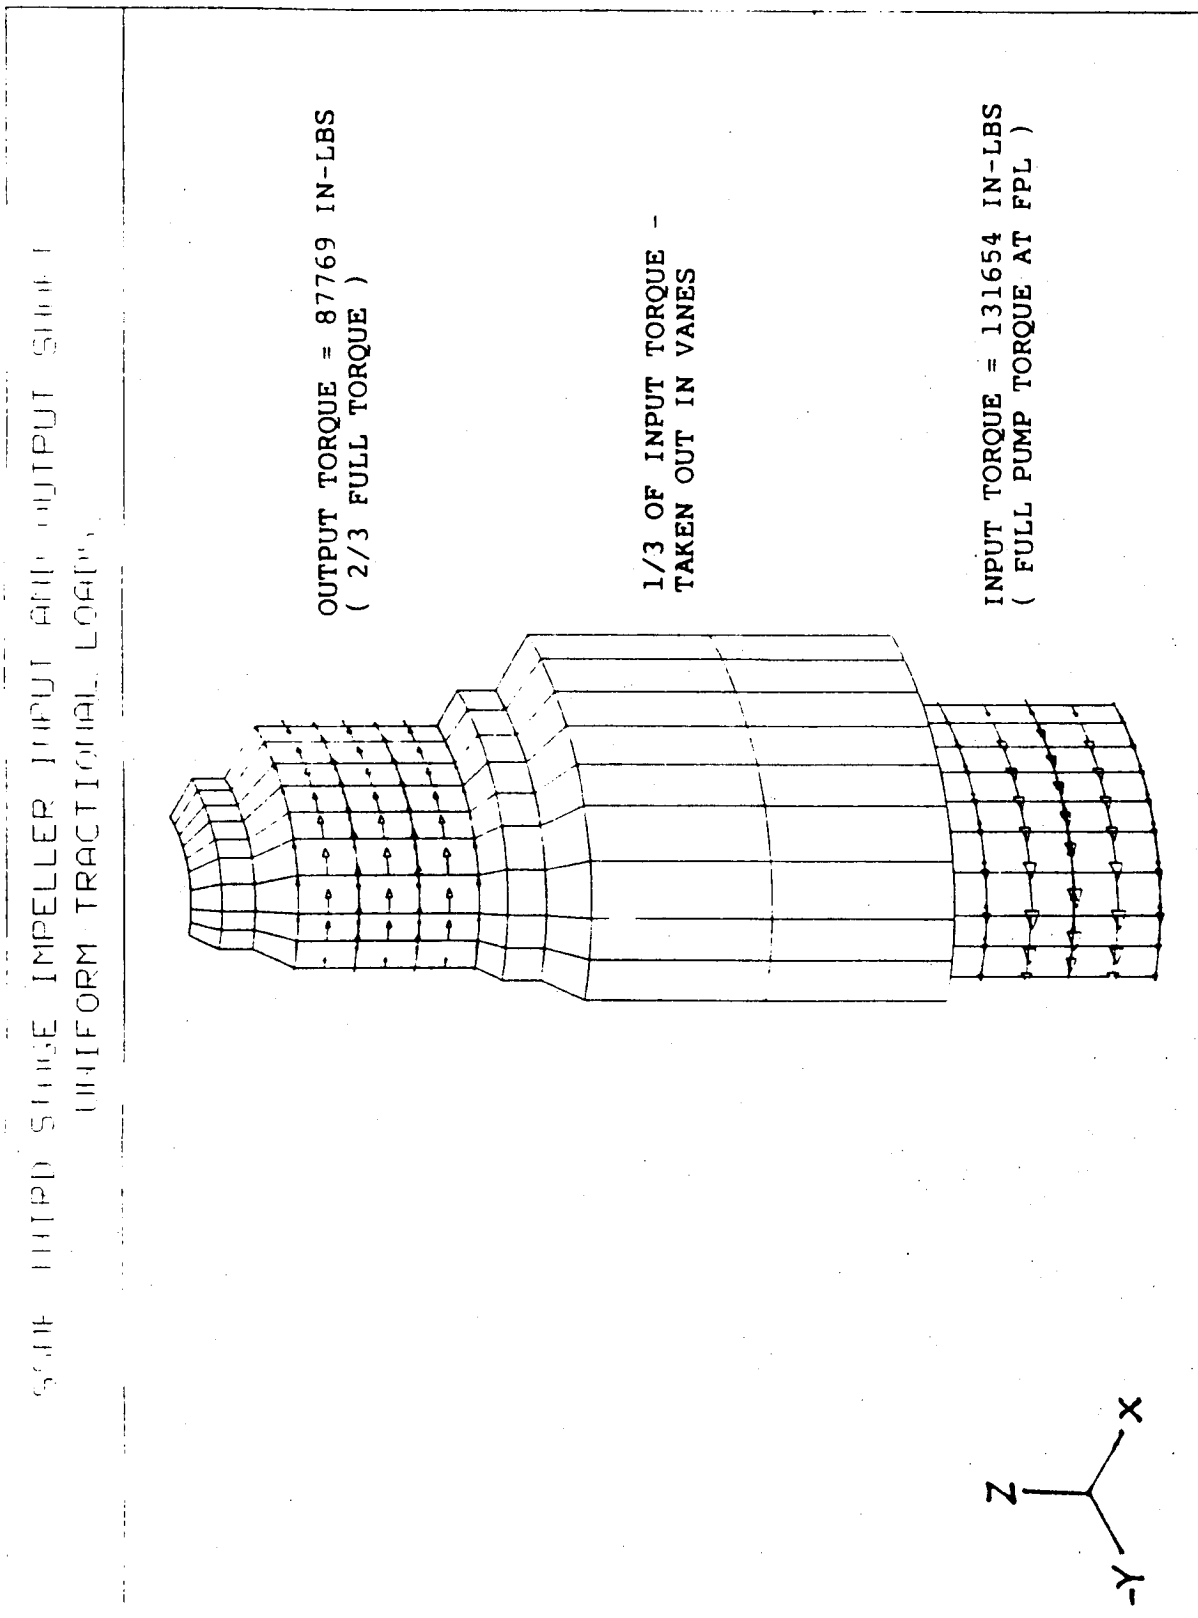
HPFTP Third Stage Impeller - Torque Loading on Shaft
